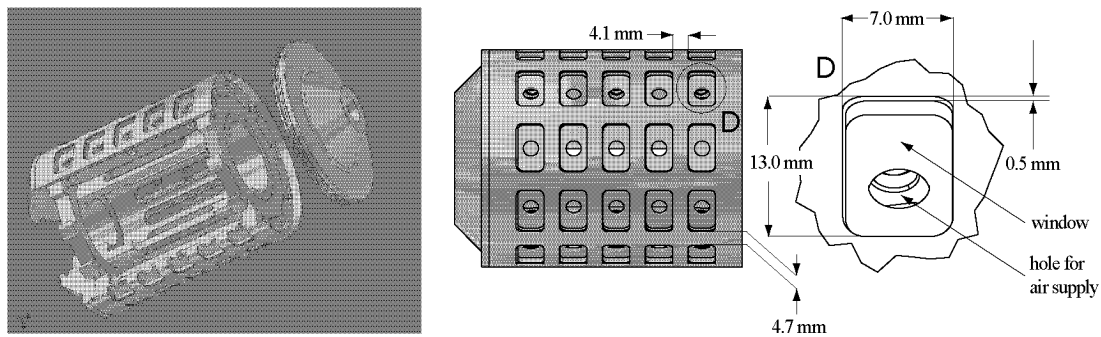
Technical drawing of clamping fixture including dimensions of windows.
